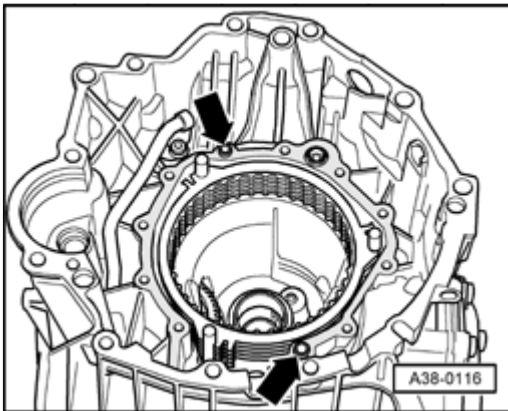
Checking Whether Bushings For Centering Flange Cover On Transmission Housing Are Installed And Seated Securely
